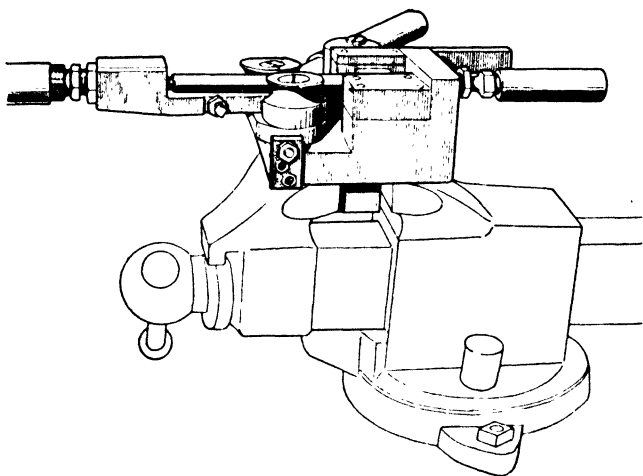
Outside rollers and inside mandrels are essential features of fixture.
